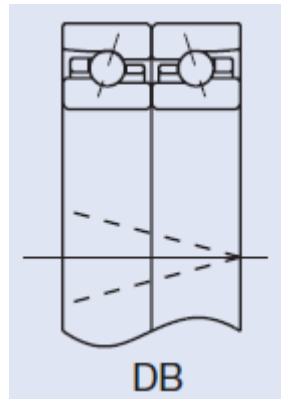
Selected Combination of Angular Contact Ball Bearing
